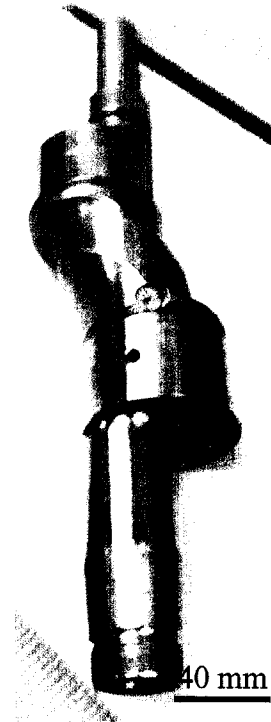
Metal shaft used for a dual rotor Mazda engine.
